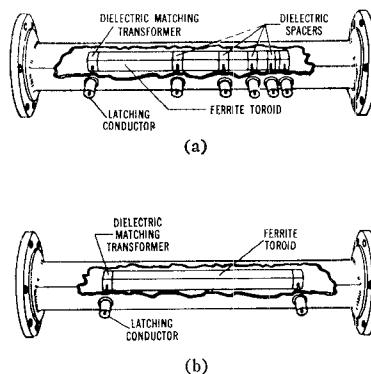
Assembled view of (a) present five-bit latching ferrite phase shifter and (b) new single-toroid design.
